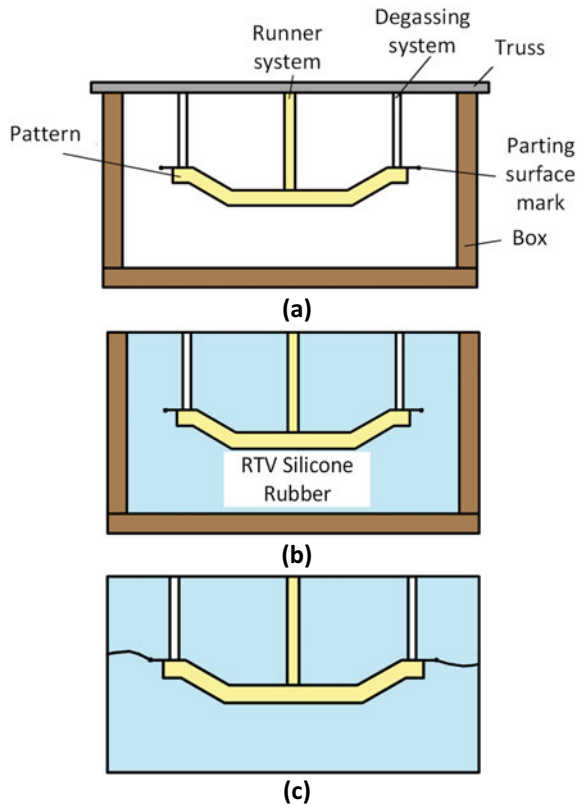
Production process of one-piece silicone mould (www.scott-Am.com, Courtesy of Ronald Simmonds, photographer Giulio Coscia)
